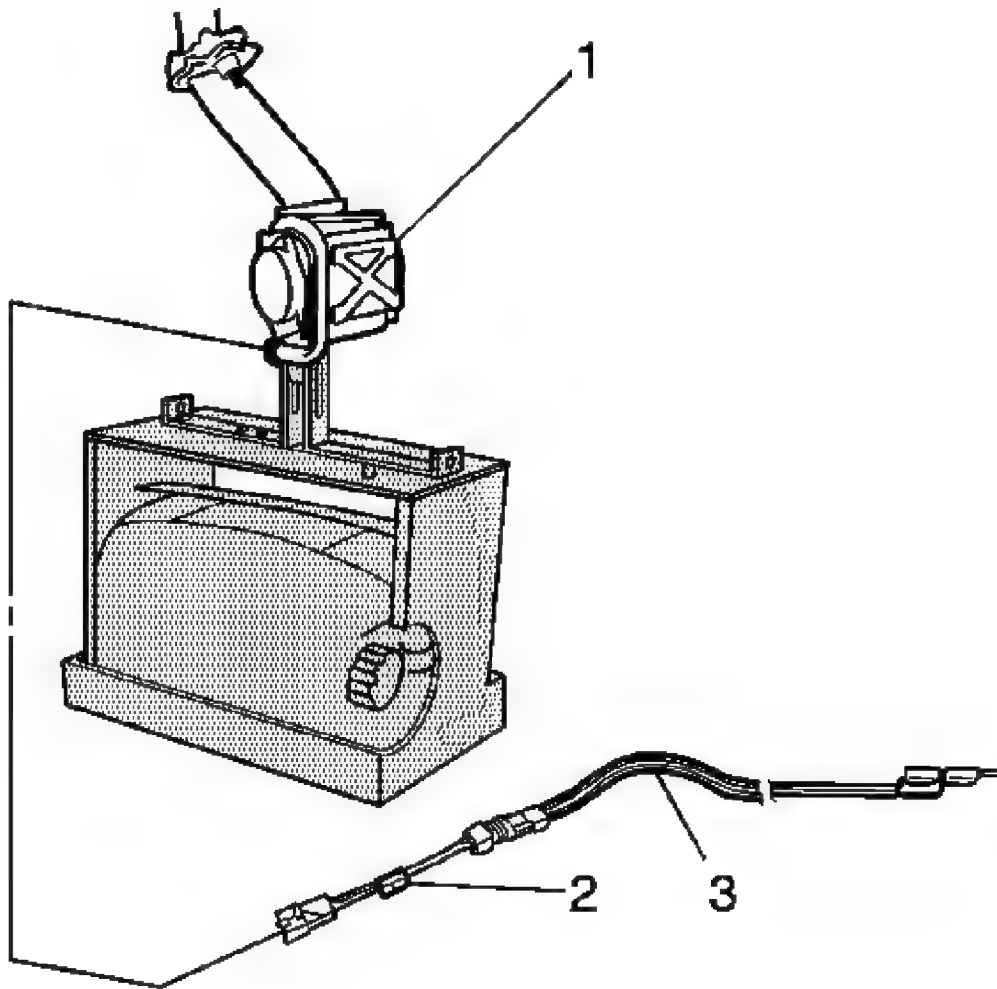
Identifying Seat Belt Pretensioner Connector, Adapter & Deployment Harness
